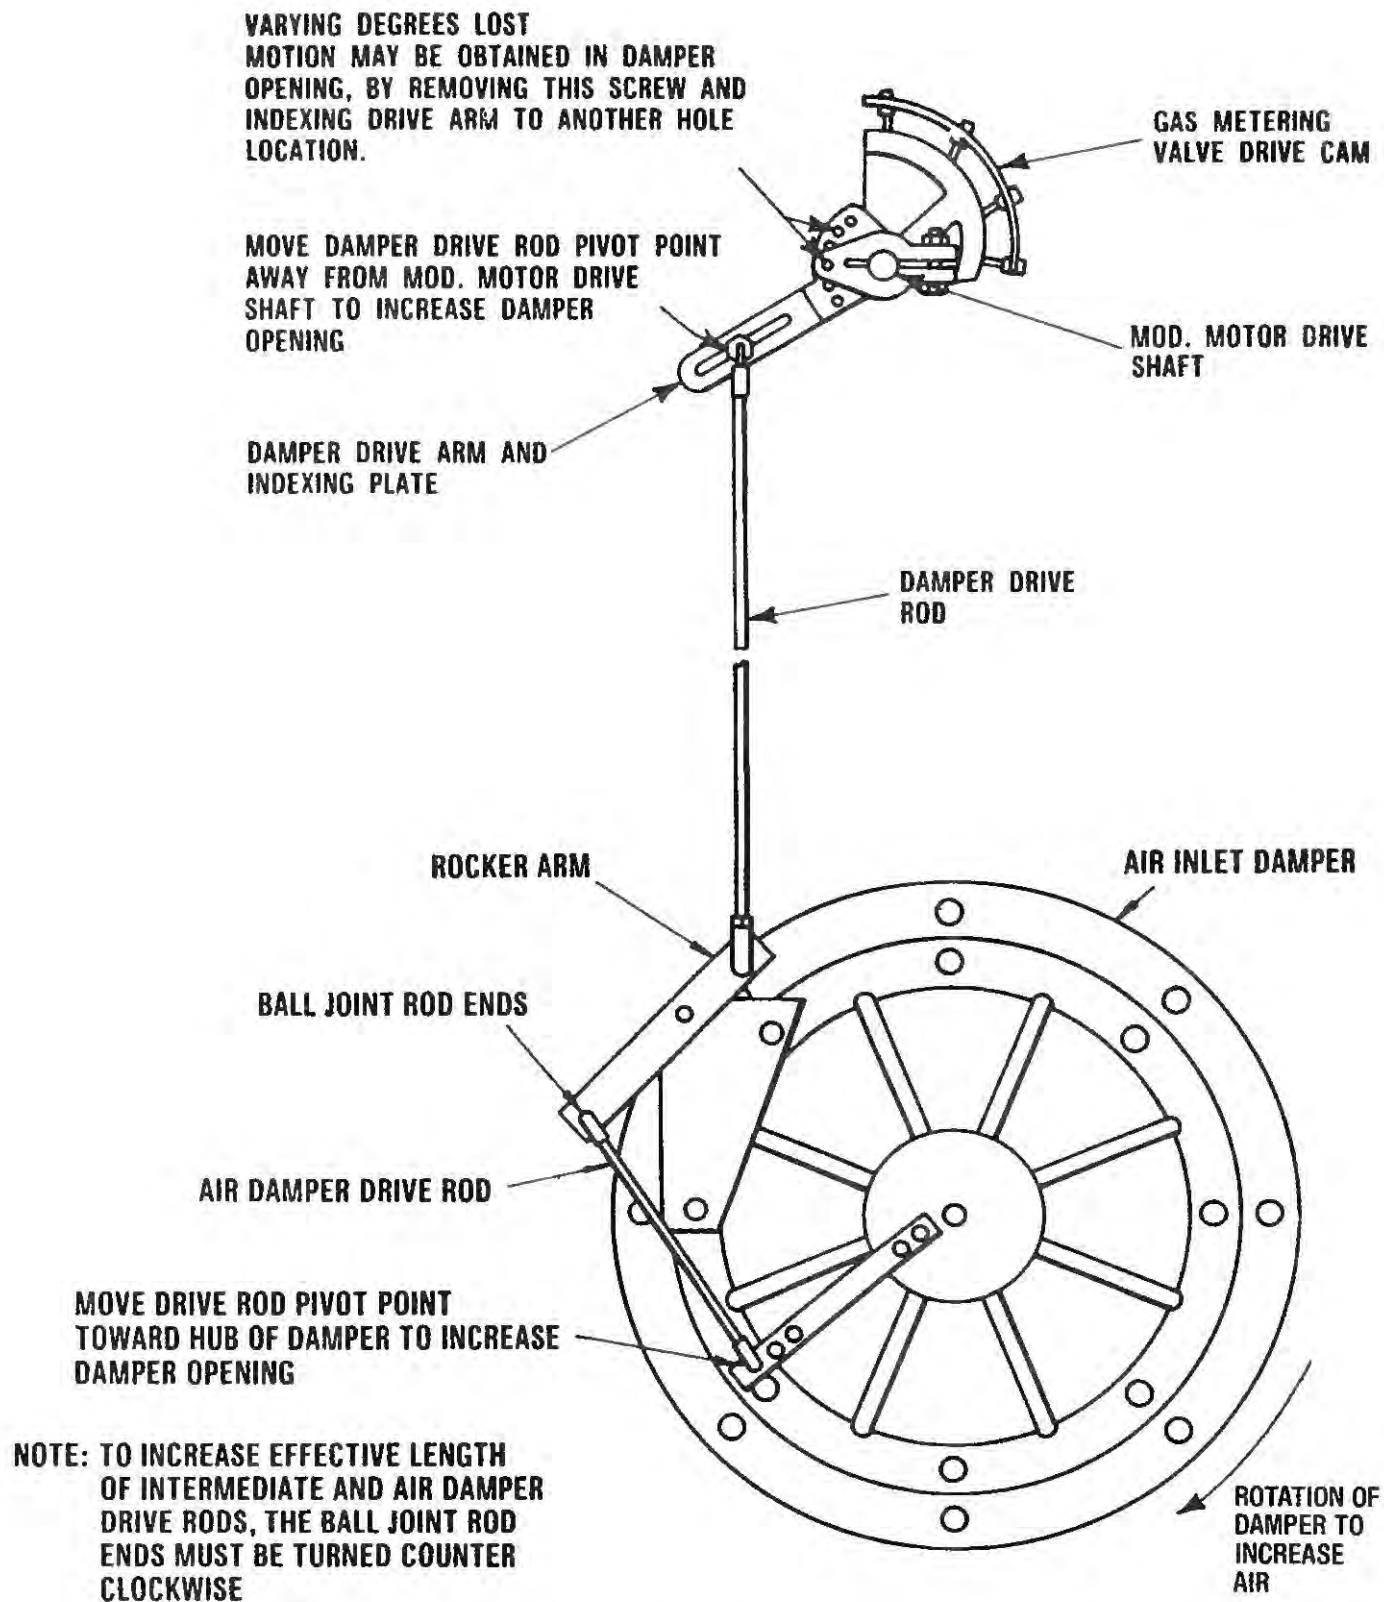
AIR DAMPER ADJUSTMENTS - 500-600 HP.
